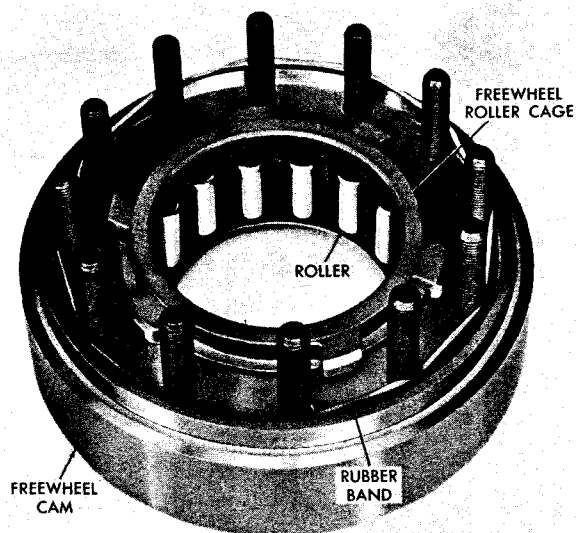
Roller cage and rollers installed in cam (in units with S/N 152 and above)
